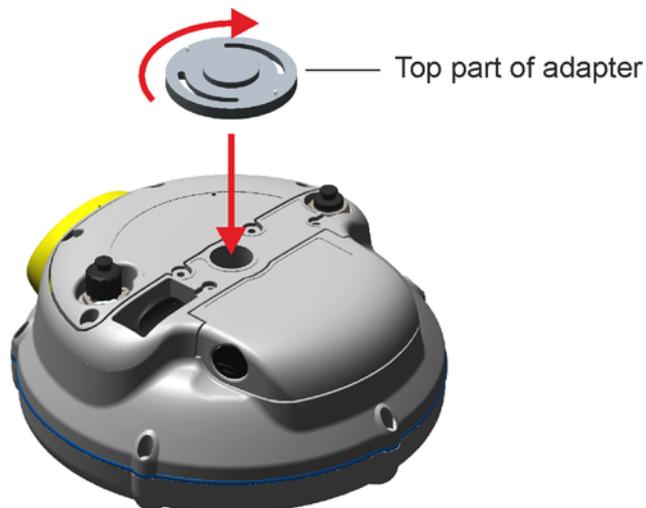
Mounting top part of adapter to the GNSS receiver
